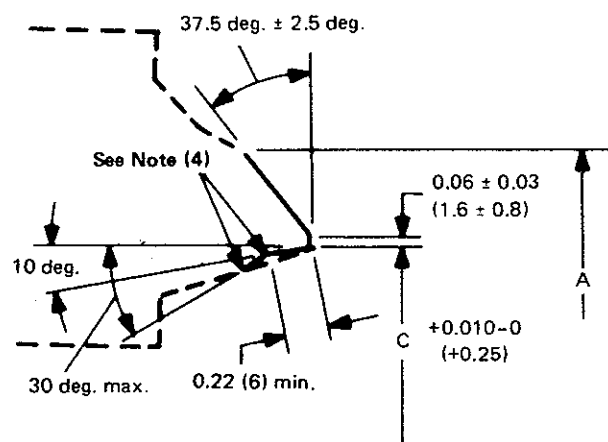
Welding End Detail for Joint Using Continuous Tapered Backing Ring.
